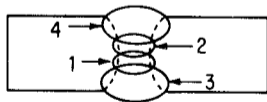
Welding sequence to balance one shrinkage force with another.
